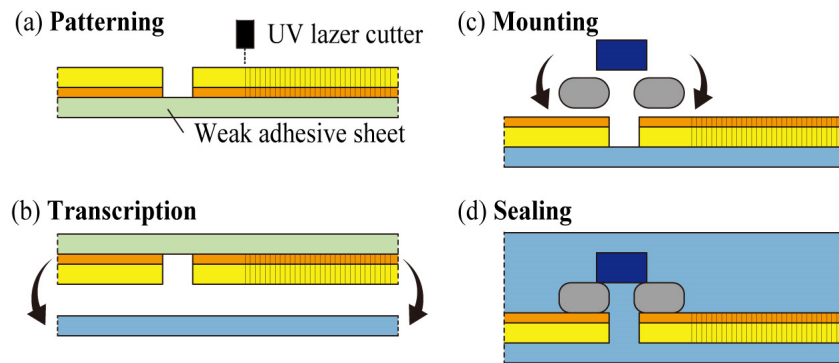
Fabrication processes of the sample for tensile test of wiring with component. (a) Cu film was cut using UV razor cutter. (b) Cu film interconnects were placed on an Ecoflex sheet. (c) Solder and galinstan was placed on the pad area of the wiring, and chip resistors were placed on them. (d) Sample was sealed with Ecoflex.
